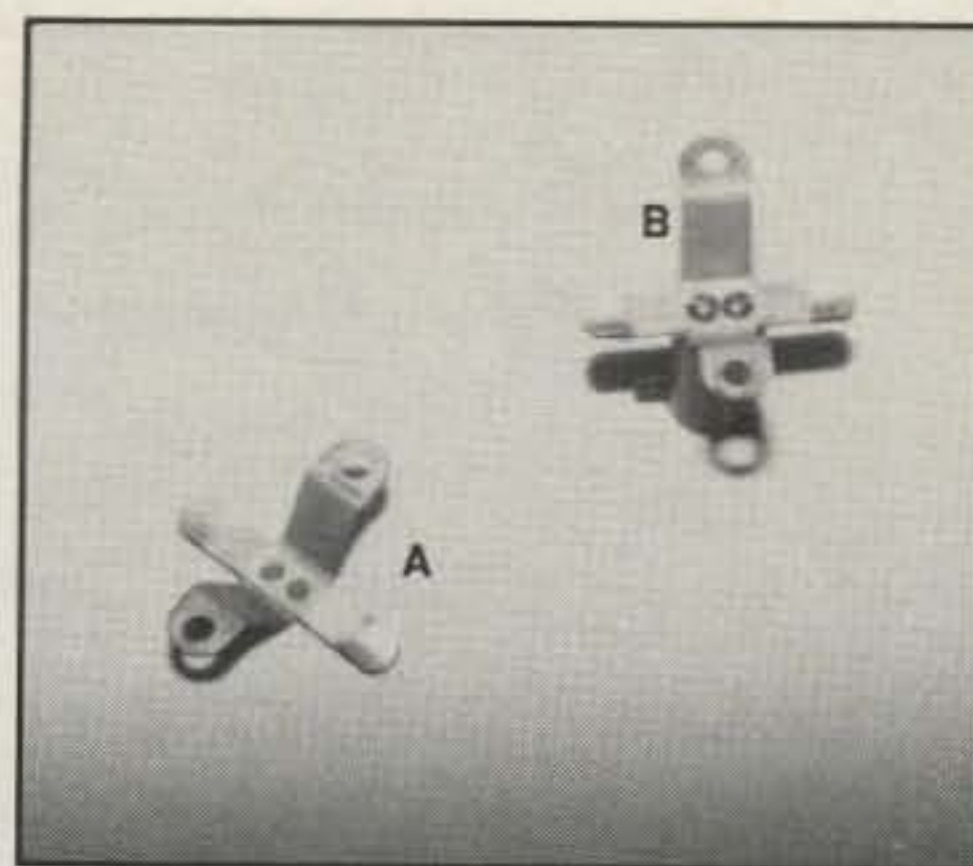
Shows two individual "V" brackets, before and after. Bracket "A" is shown in unmodified form. This bracket is soldered at the center to the cross-mounted rotary contact and the rivets are then drilled out. Modified bracket at "B" shows Delrin coupling mounted to bracket with two brass screws.
